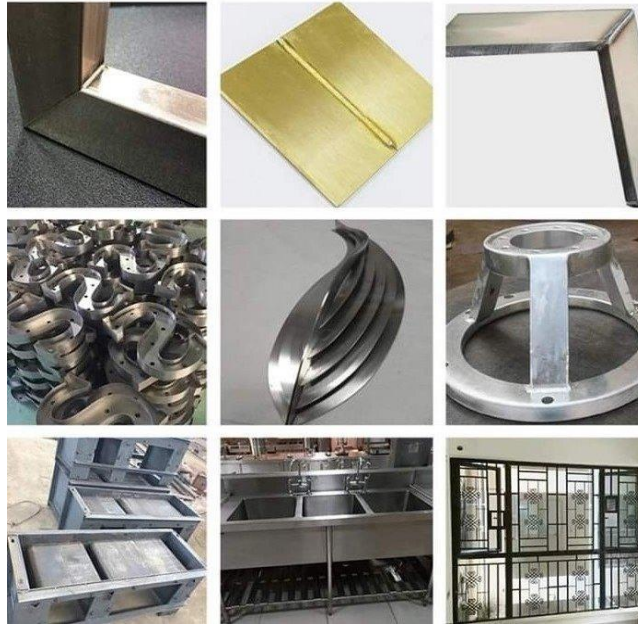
Application of laser welding technology for the sheet metal furniture industry
